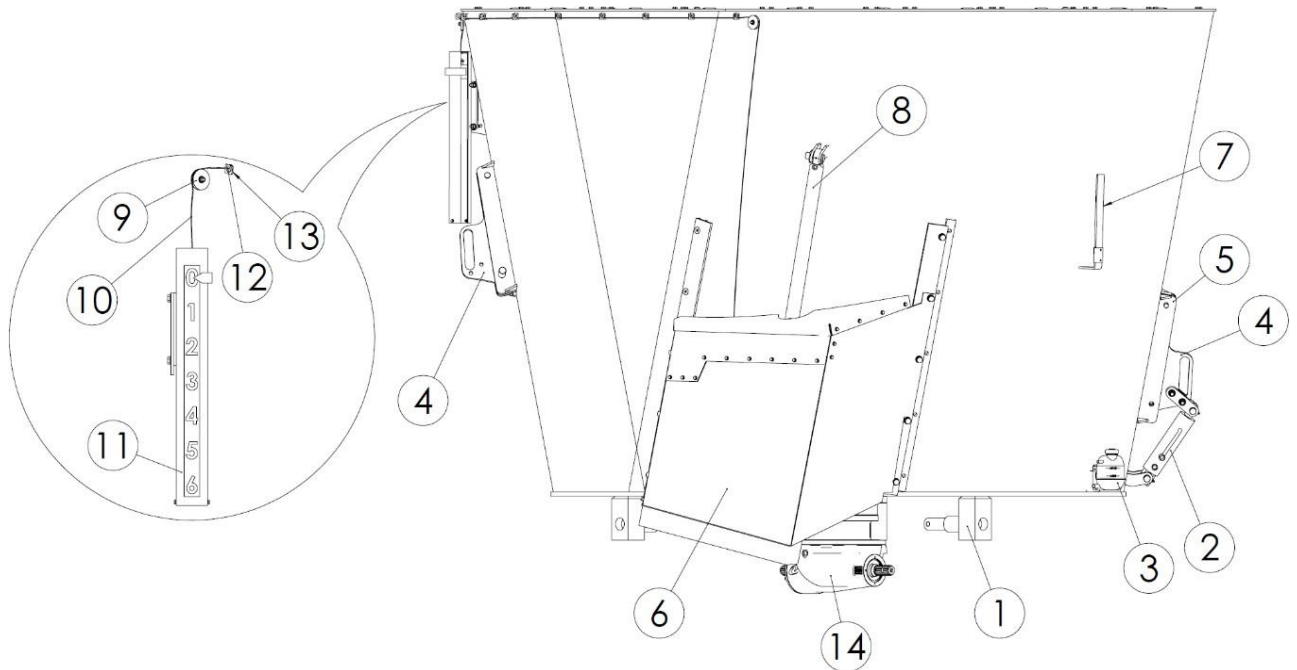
Complete tank: 1 - weight sensor cube, 2 - hydraulic counterblade actuator, 3 - gear oil expansion tank, 4 - counterblade, 5 - counterblade installation plate, 6 - discharge, 7 - warning triangle fixture, 8 - gate actuator, 9 - indicator cable guiding wheel, 10 - indicator cable, 11 - gate opening indicator, 12 - cable guide sleeve, 13 - sleeve fixture, 14 - planetary gear
